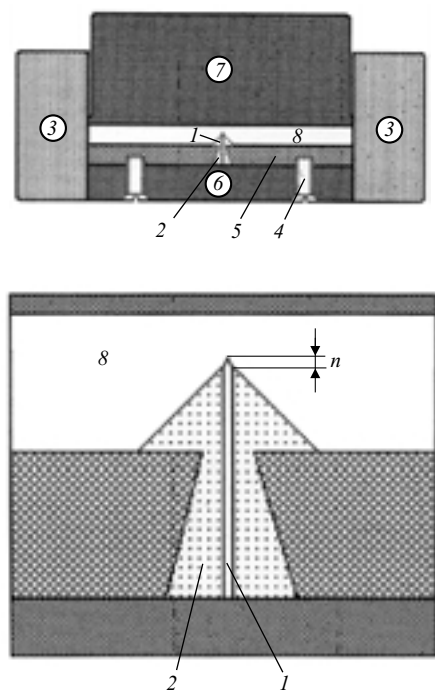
Schematic diagram of the mold for molding notched samples: 1) steel blade; 2) wedge; 3) matrix; 4) fixing bolts joining parts 5 and 6 of the bottom punch; 7) upper punch; 8) sample; n) height of the blade sharpening.
